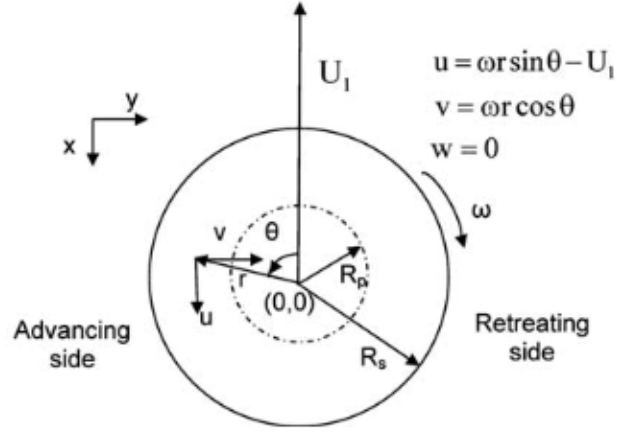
A top view for a schematic diagram of FSW tool [28].
